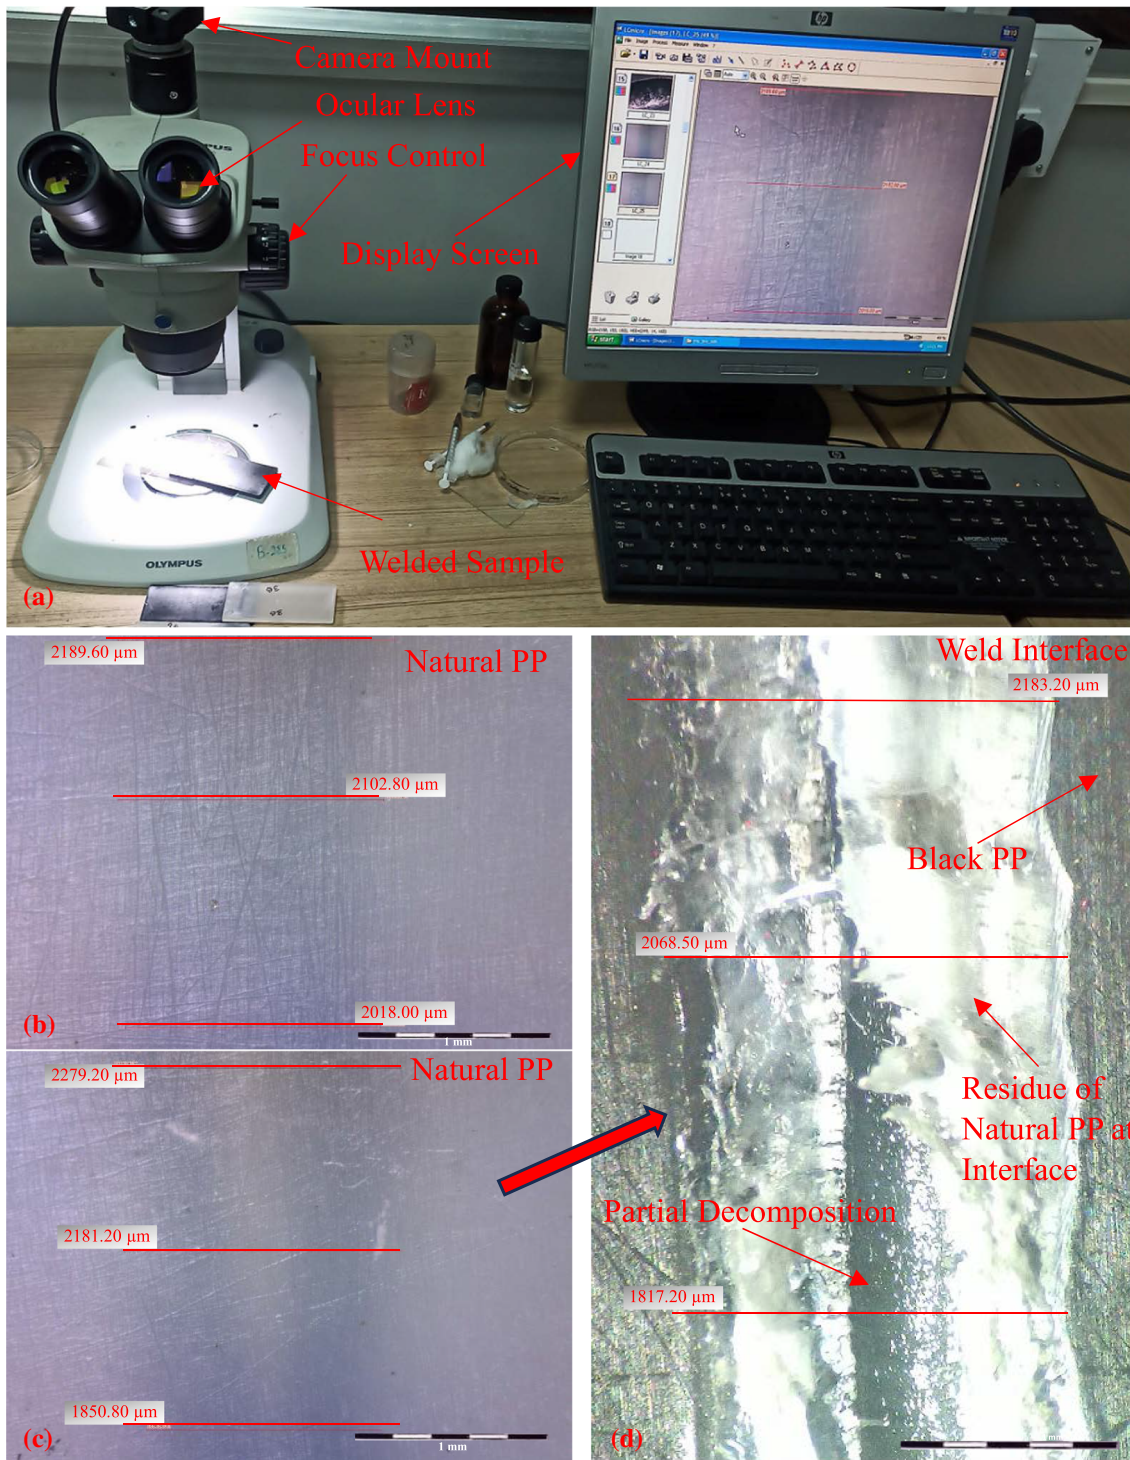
(a) Photograph of the weld width measuring apparatus, (b, c) measured weld width through the top natural PP, and (d) measured weld width at the weld interface after removing the top natural PP.
